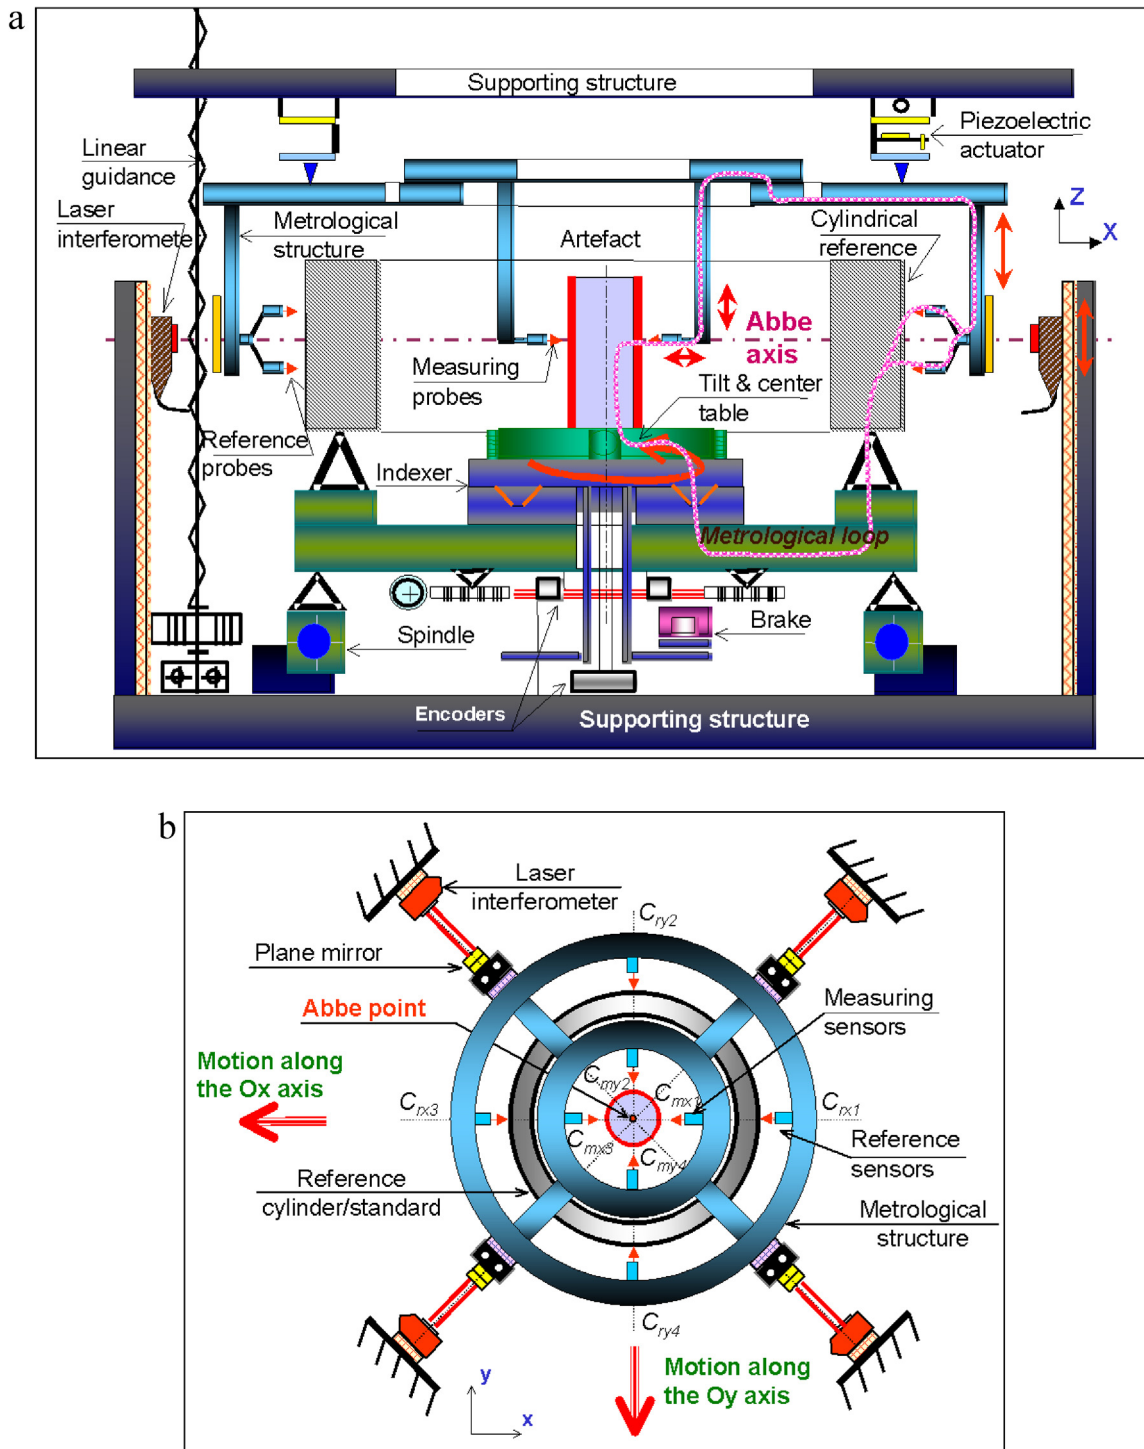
Architecture of the ultra high-precision geometry measurement machine. (a) Sketch of the high-accuracy geometry measurement machine. (b) Schematic of the in situ calibration structure.
